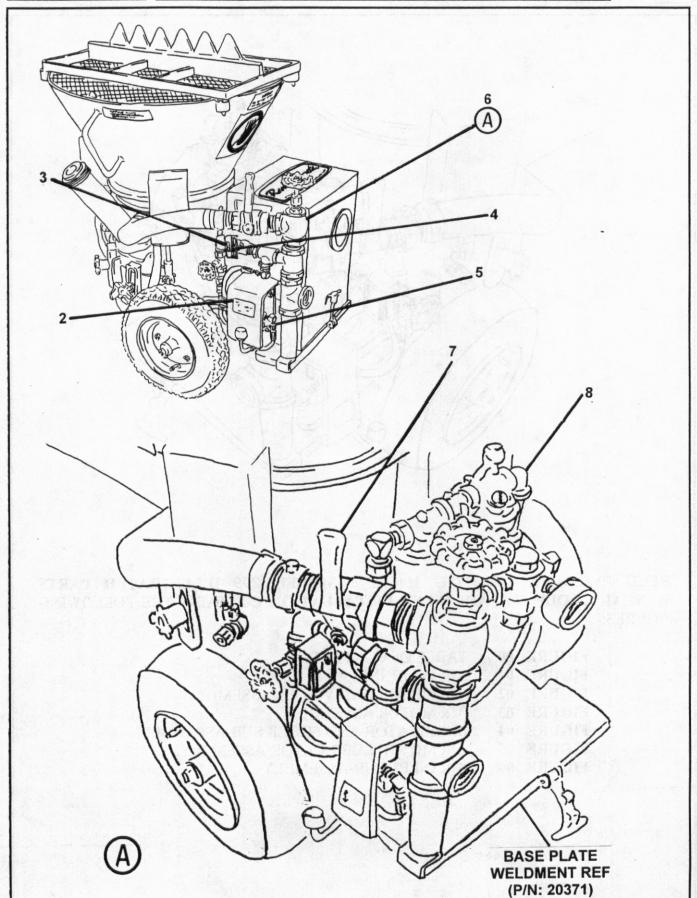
AIR MOTOR LUBRICATOR ASSEMBLY
